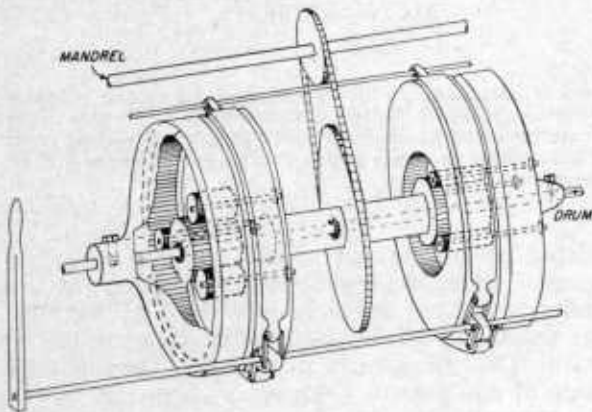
Chain-driven feed works with lever-controlled brake bands on split housings. Chain drive rotates hollow shaft within which drum shaft floats freely. When brake band on one housing is loosened by lever, brake band on the other housing is tightened. Rotation of hollow shaft is transmitted to housings through planet gears to inner side of housing rim. Housings rotate drum shaft through pin engaging housing with shaft.
